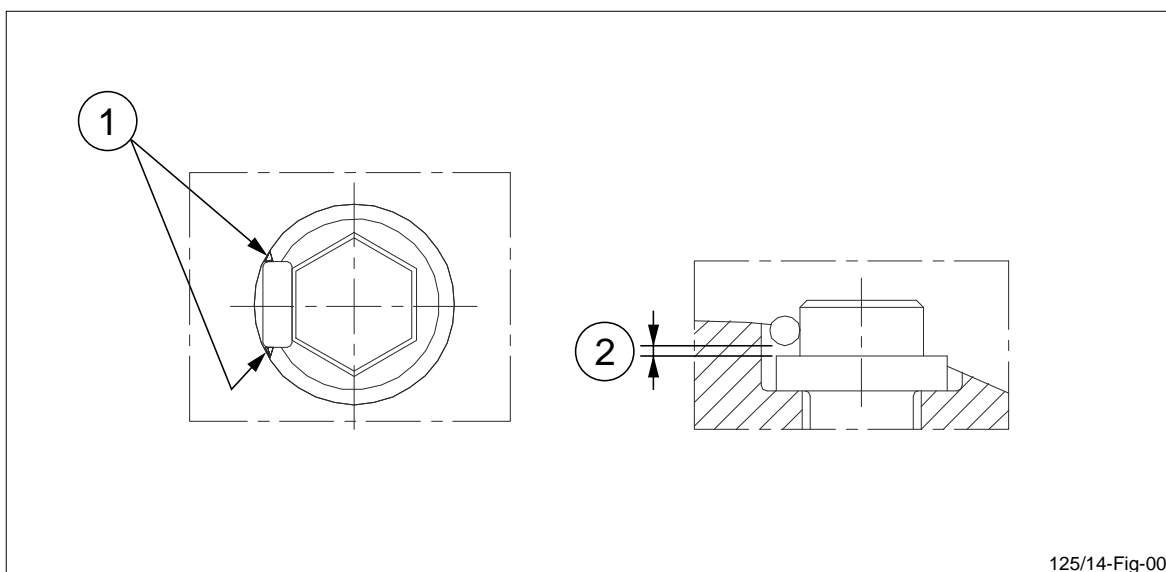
Lock the blade bolts by fastening a steel rod by spot welding.
